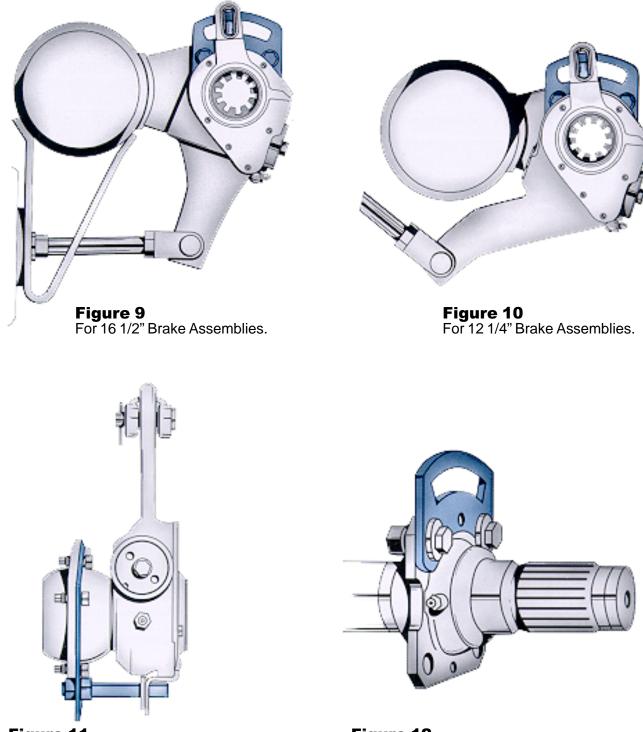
Integral cam support anchor bracket for 12 1/4" and 16 1/2" brakes.
